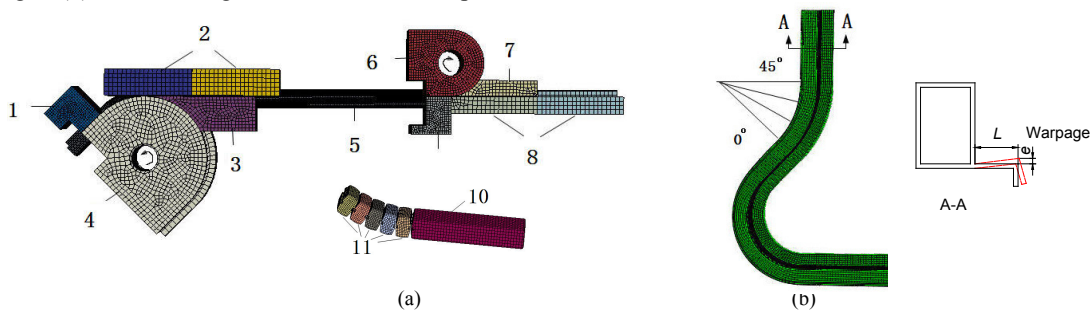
(a) FE model of the aluminum tube in multi-stage rotary draw bending (1. Clamp die-big; 2. Pressure die-big; 3. Wiper die-big; Bend die-big; 5. Specimen; 6. Bend die-small; 7. Wiper die-small; 8. Pressure die-small; 9. Clamp die-small; 10. Mandrel; 11. Flexible cores). (b) Final product after multi-bending process.
